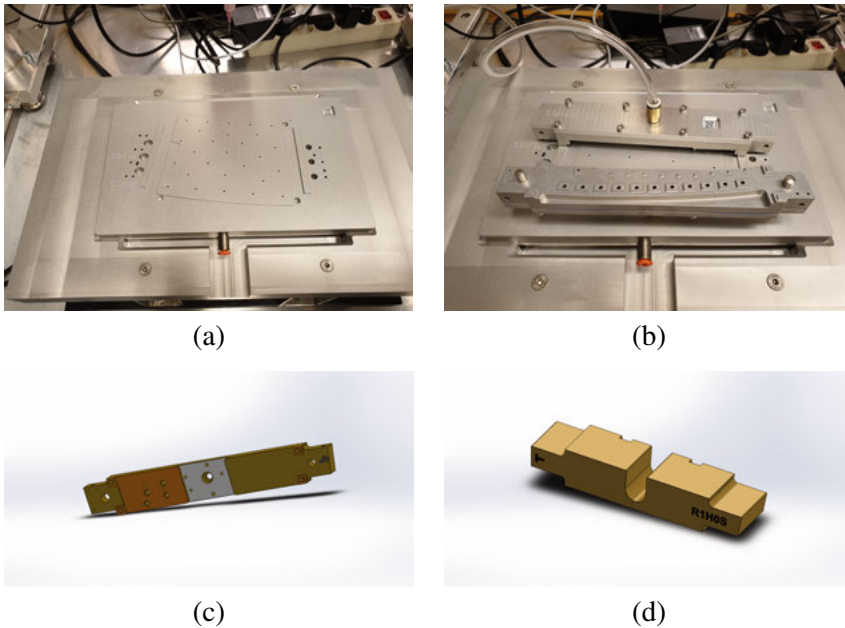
Tools for the Hybrid/Powerboard-to-Module assembly. The pictures show: the sensor support jig (a), the hybrids pick-up tools (b), the powerboard pick-up tool (c) and the weights (d) for the R1 module type.
